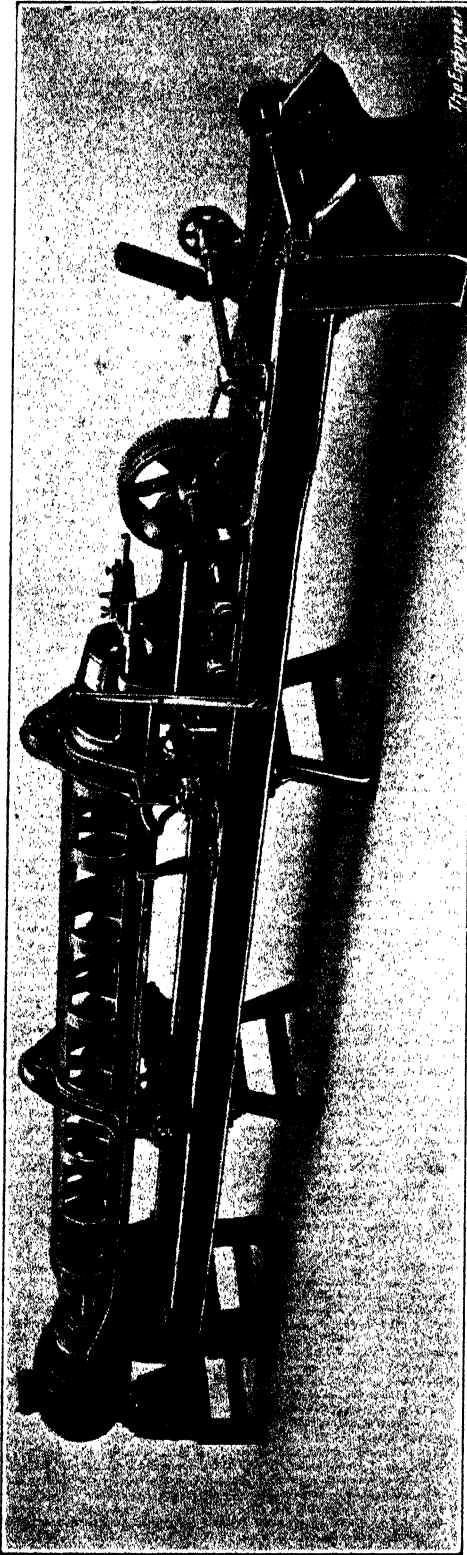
SEVEN-BOBBIN 6½-INCH DIAMETER STRANDING MACHINE.
